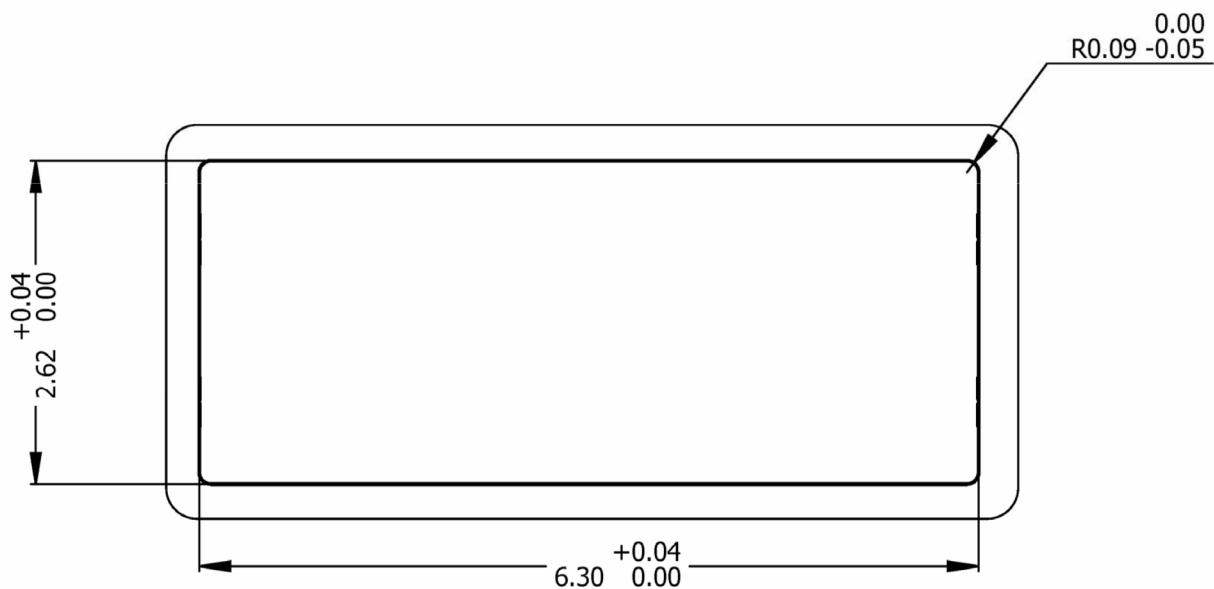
GTN 6XX Xi Panel Cutout Detail
